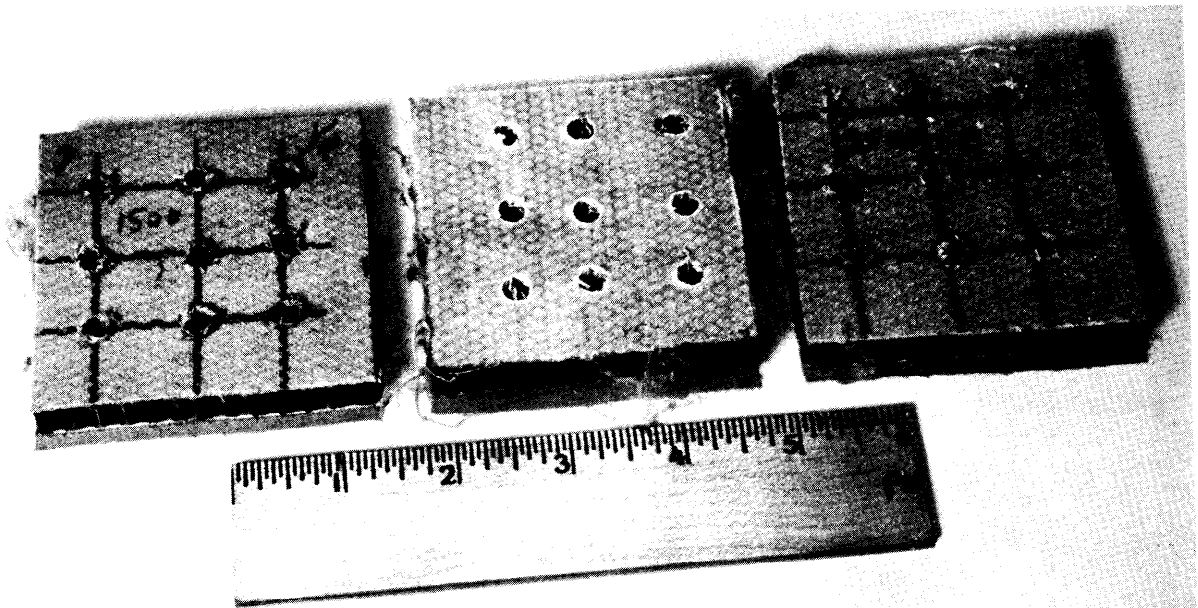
DRILL: .250 DIAMETER STANDARD DRILL
